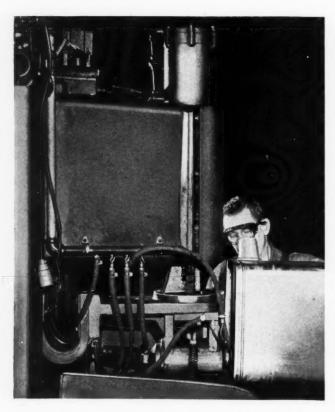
Circular Seam-welder with Smalldiameter Upper Welding Wheel to Facilitate Welding of Inside Corners. Over 100 Inches of Seam per Tank are Welded on This Machine
